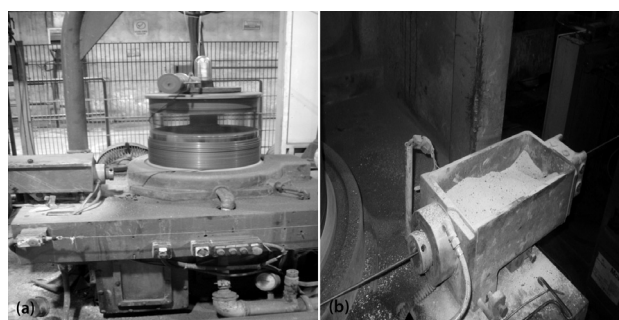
a) Outlets of a drawing die with a wire coil and b) a drawing die (matrix) with a soap box
